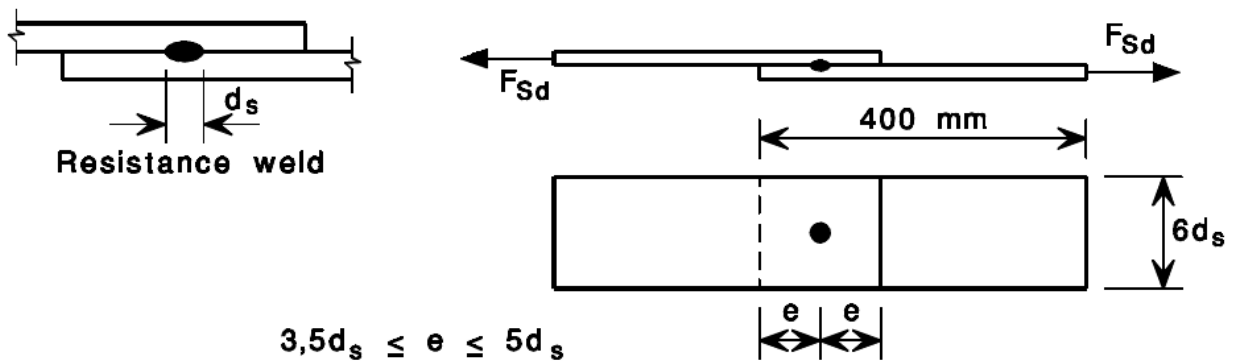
The dimensions of the specimens according to EN1993-1-3
